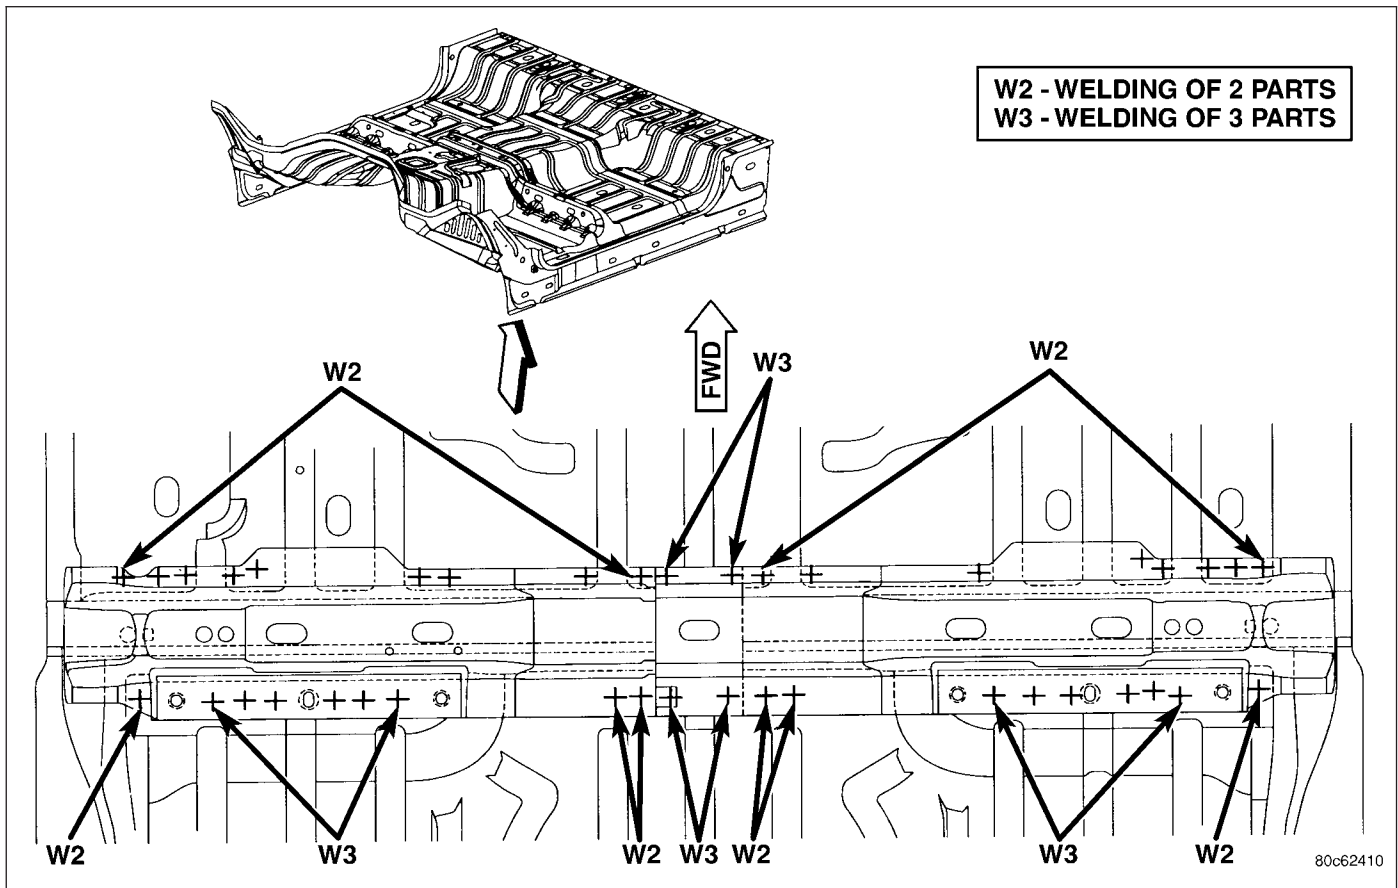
FRONT SEAT MOUNTING CROSSMEMBERS - STANDARD CAB
